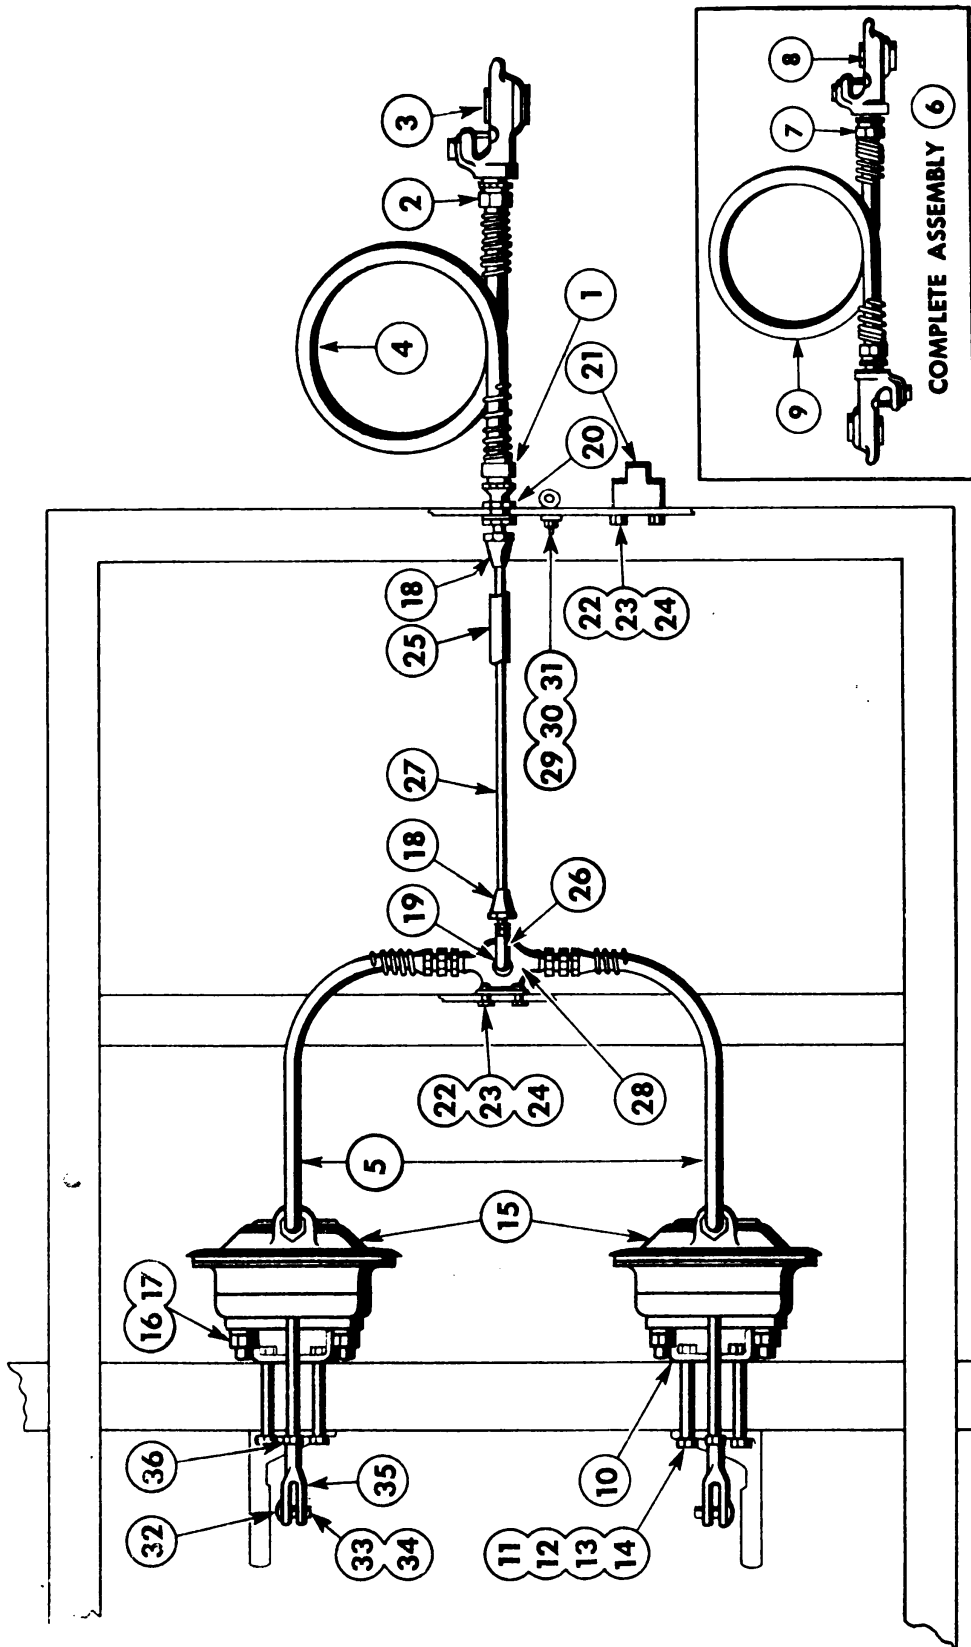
OPERATING PARTS FOR BRAKES—CONVERTER GEAR
